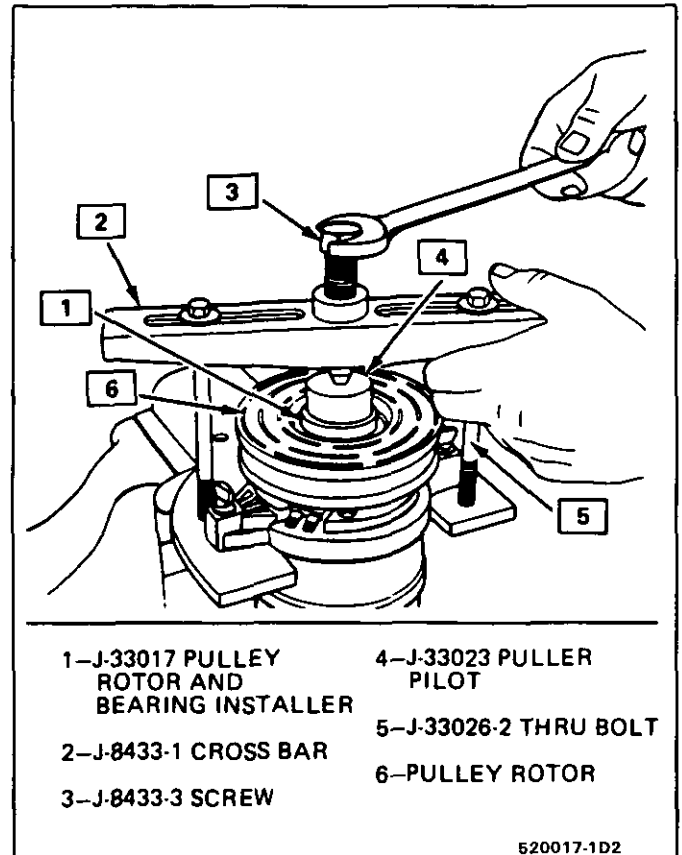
Installing Pulley Rotor and Bearing Assembly
